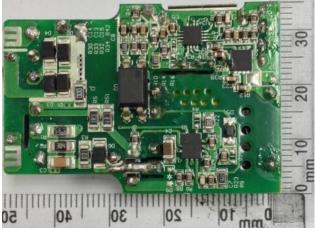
Bottom View (Dimension 45 x 32 [mm2])
